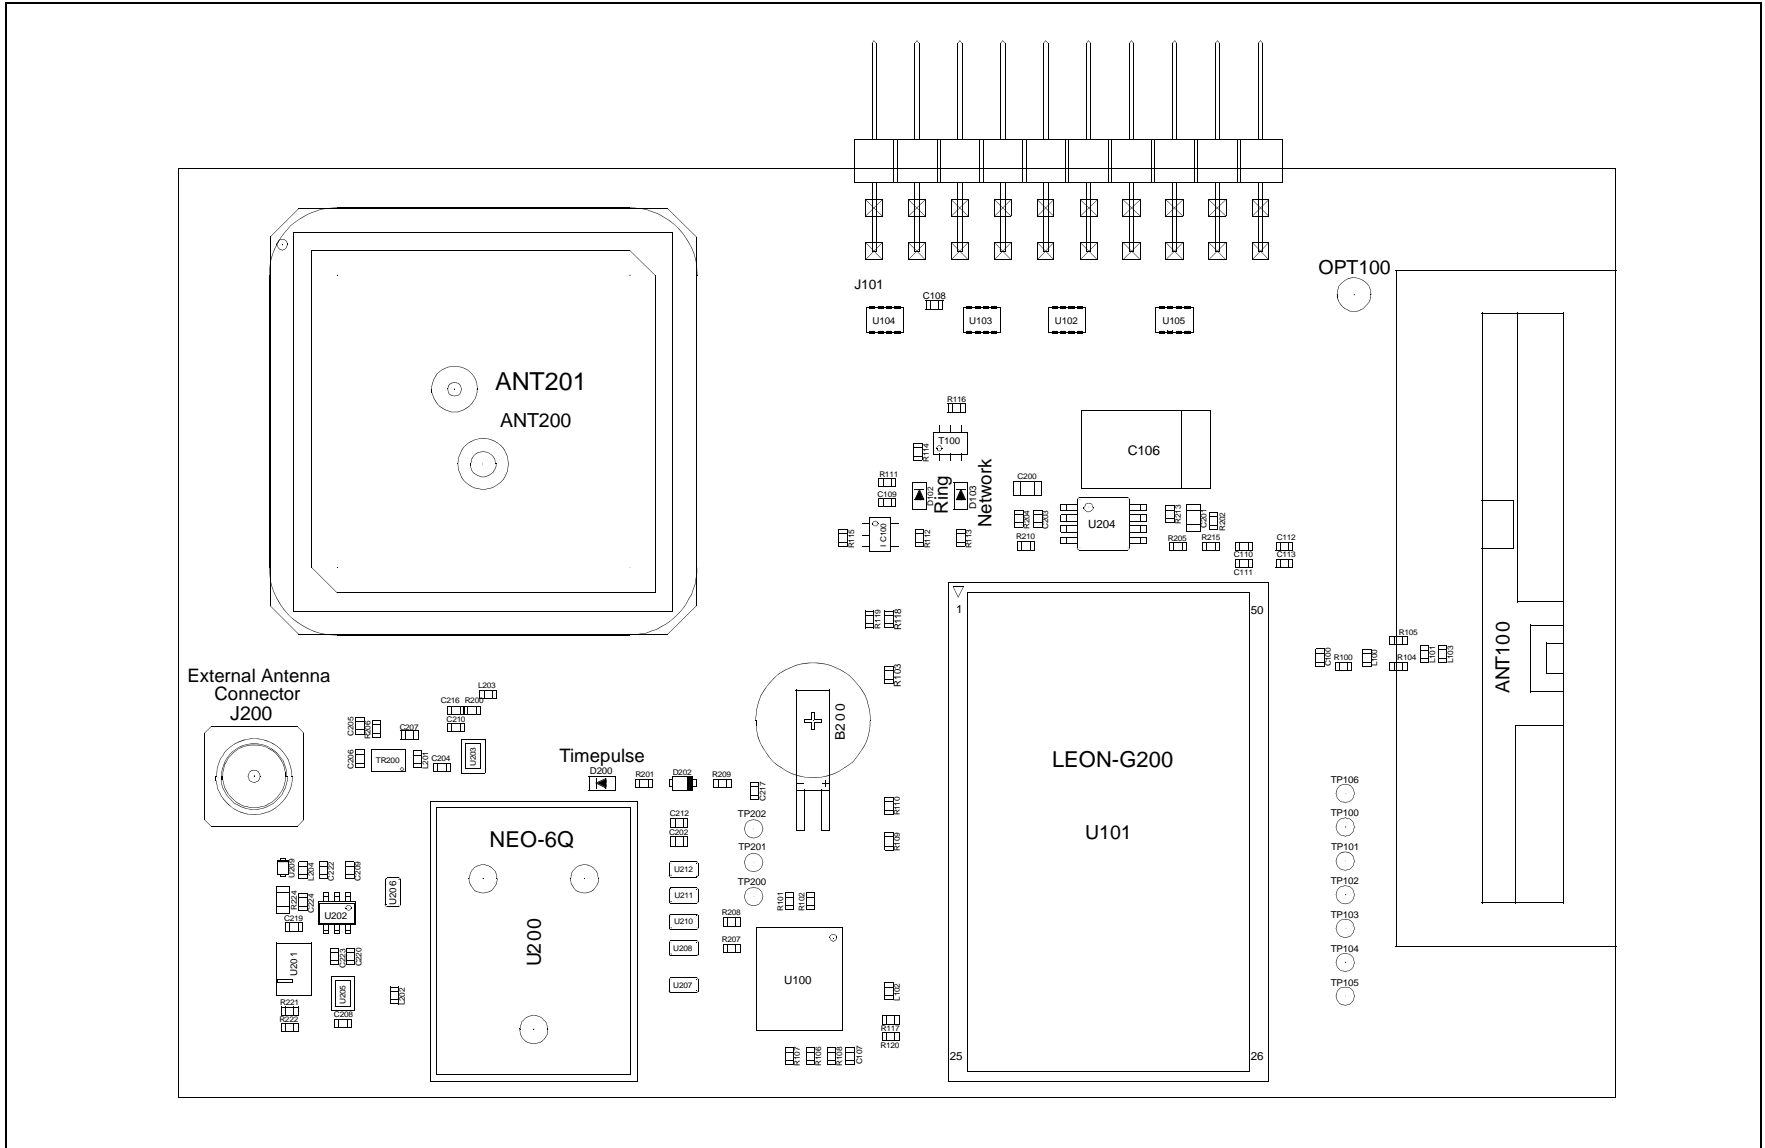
M2M BOARD LAYOUT (BOTTOM ASSEMBLY)
